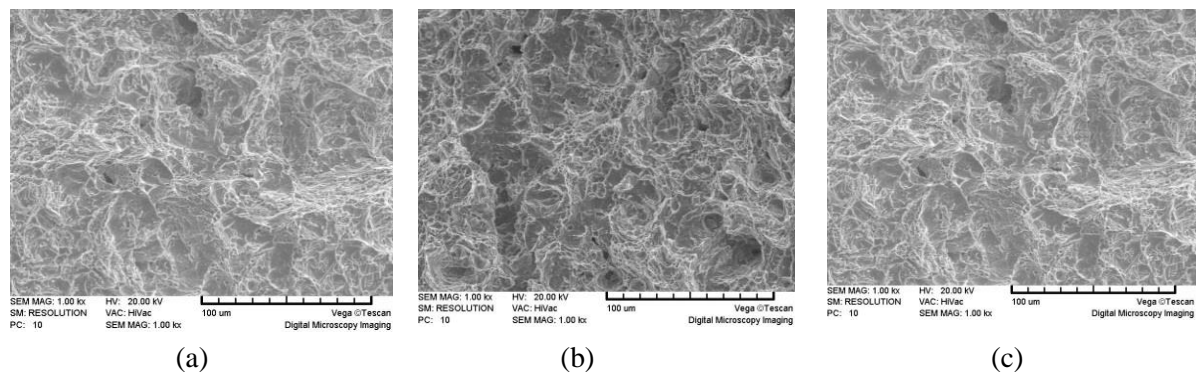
The rupture appearance of aged for 1000h: (a) the welding zone, (b) the heat affected zone, (c) the base metal
